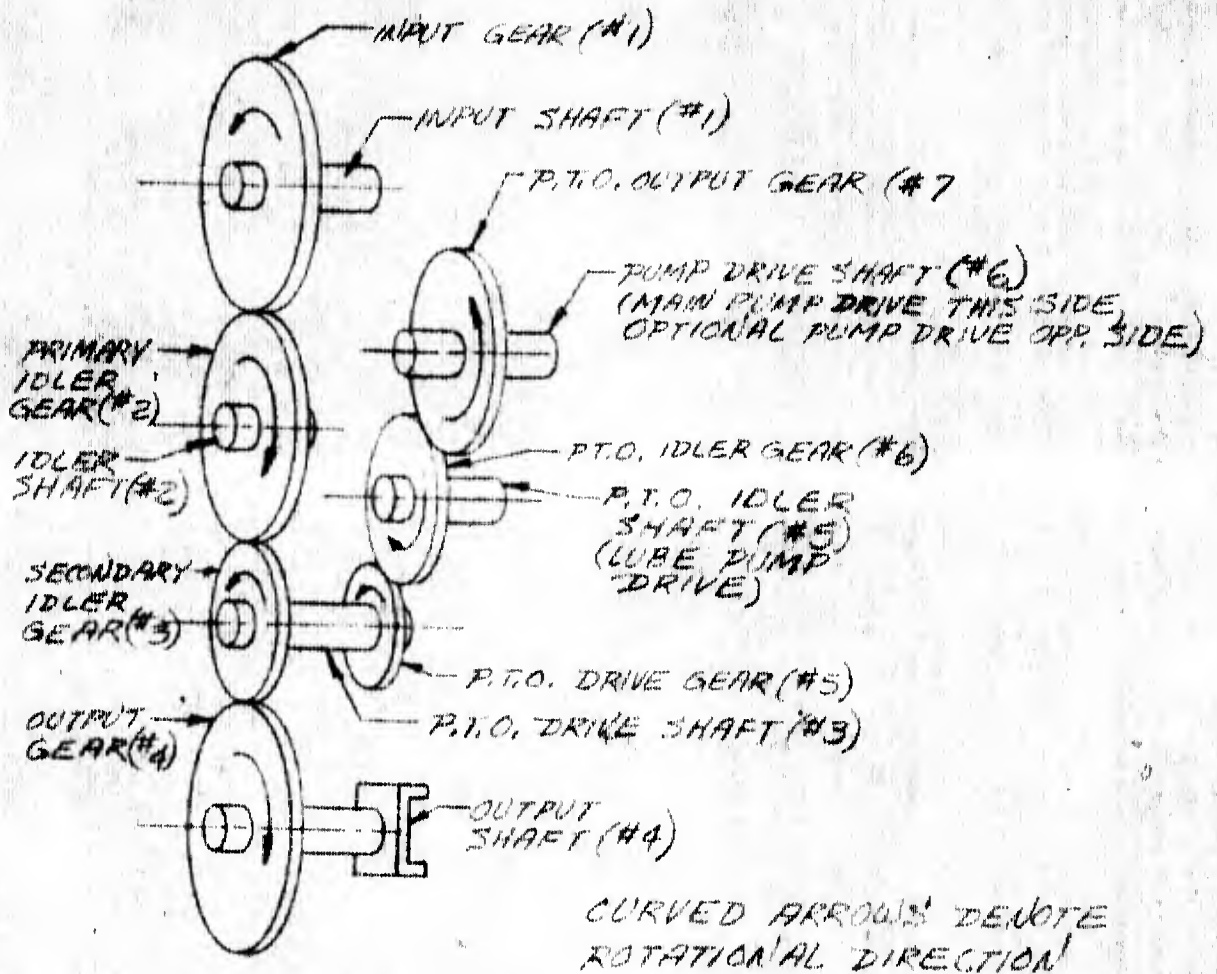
SCHEMATIC SHOWING TRANSFER GEARBOX GEARING AND SHAFTING ARRANGEMENT
